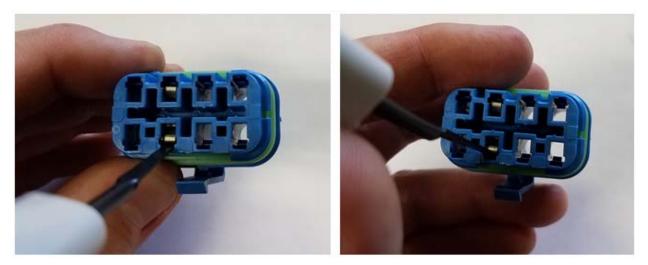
Inserting Wire/Contact into Connector Housing from Back
